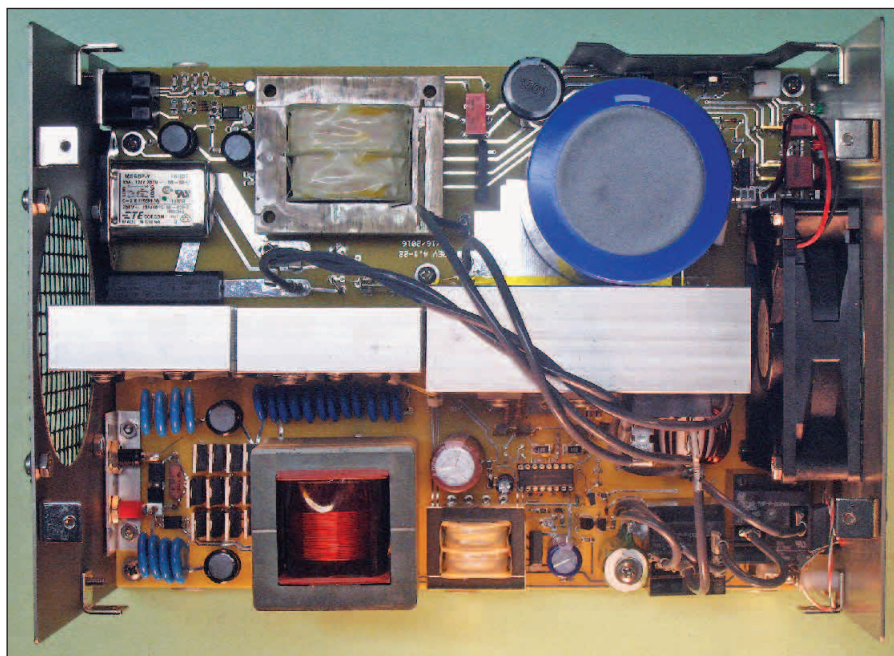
A top view shows the heatsinks across the mid-section of the single printed circuit board, and the high-voltage transformer mounted beneath it.
